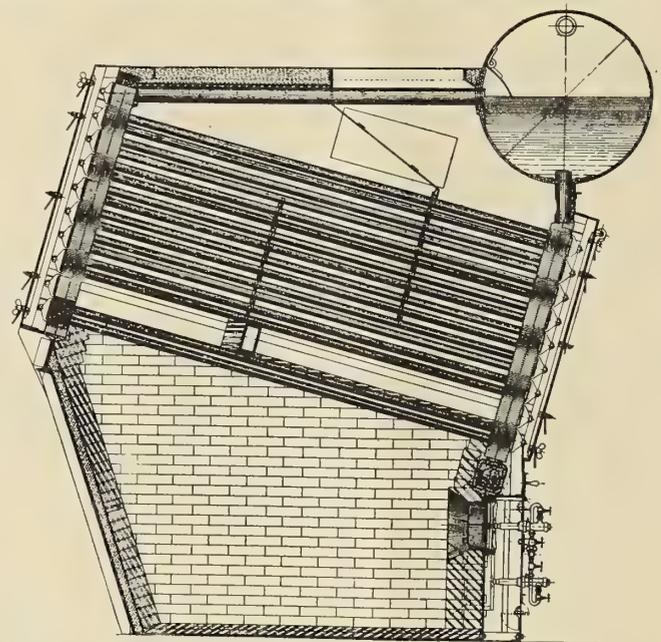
FURNACE OF BABCOCK & WILCOX BOILER
